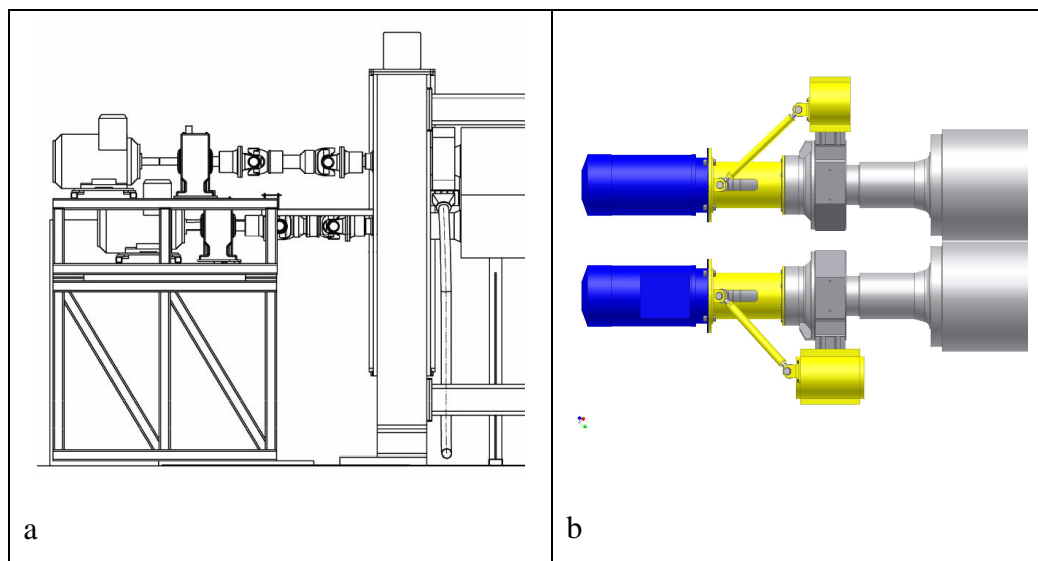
Geared (a) and gearless (b) drive units of the pilot roll press used in this investigation.
